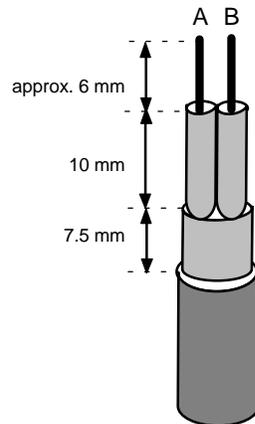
Preparing the Ends of the Cable for the Bus Connector with Axial Cable Outlet
